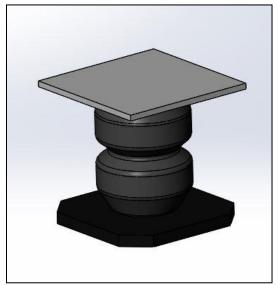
Plastic Shim, Rubber Spring and Spring Center Plate
